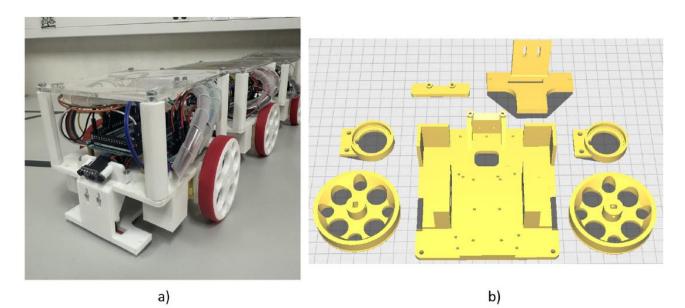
a) Assembled mobile robots. b) Mechanical design.
